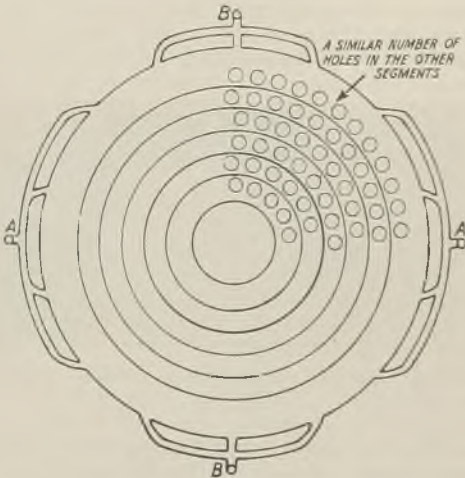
METHOD OF GATING THE CASTING SHOWN IN FIG. 10.
